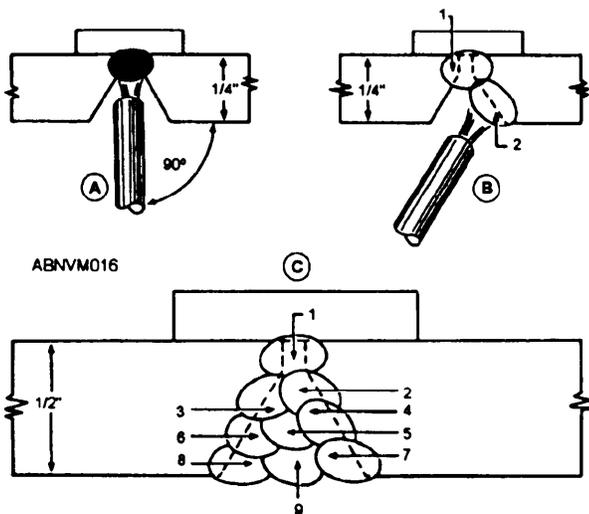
Bead sequence and electrode angle for welding a butt joint in the overhead position.
